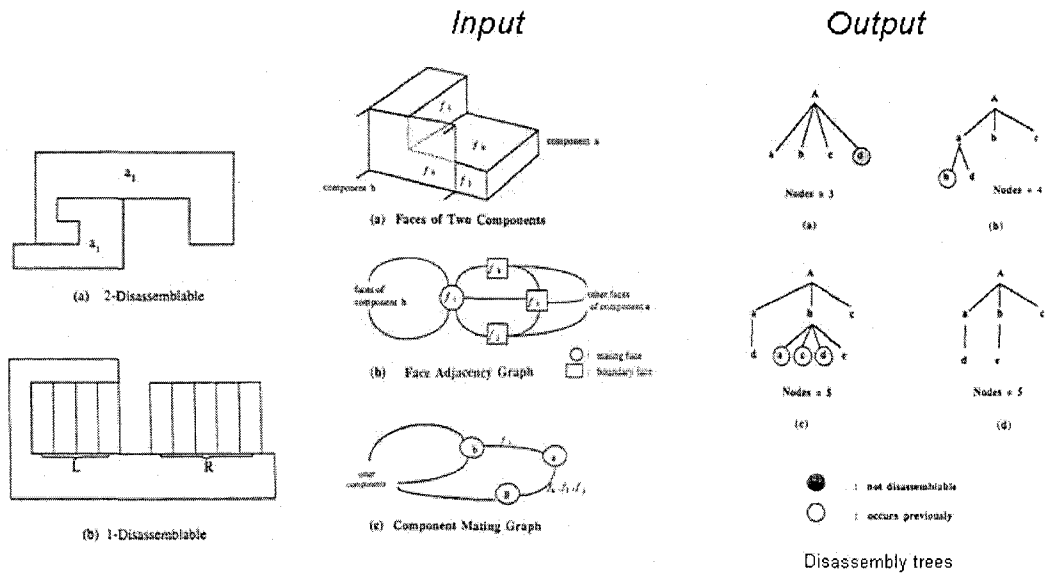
m -disassemblable components and generation of “disassembly tree” [55]
